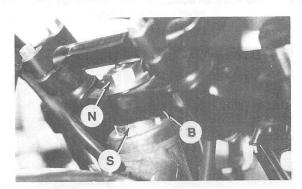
View identifies steering stem bracket nut (N), steering bracket (B) and slotted nut (S).
